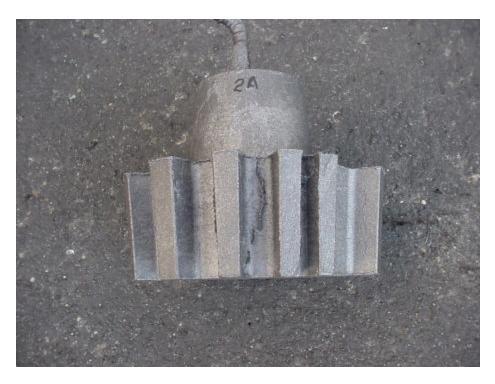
Picture of Median Appearance Cavity A Casting from Mold FL004
